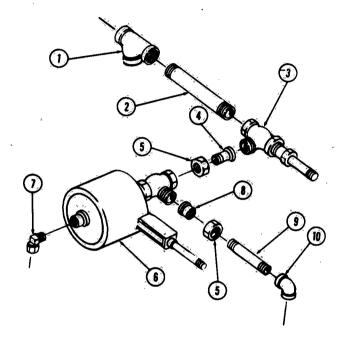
STEAM SÚPPLY	ASSEMBLY - V	acamatic and	Gravity
